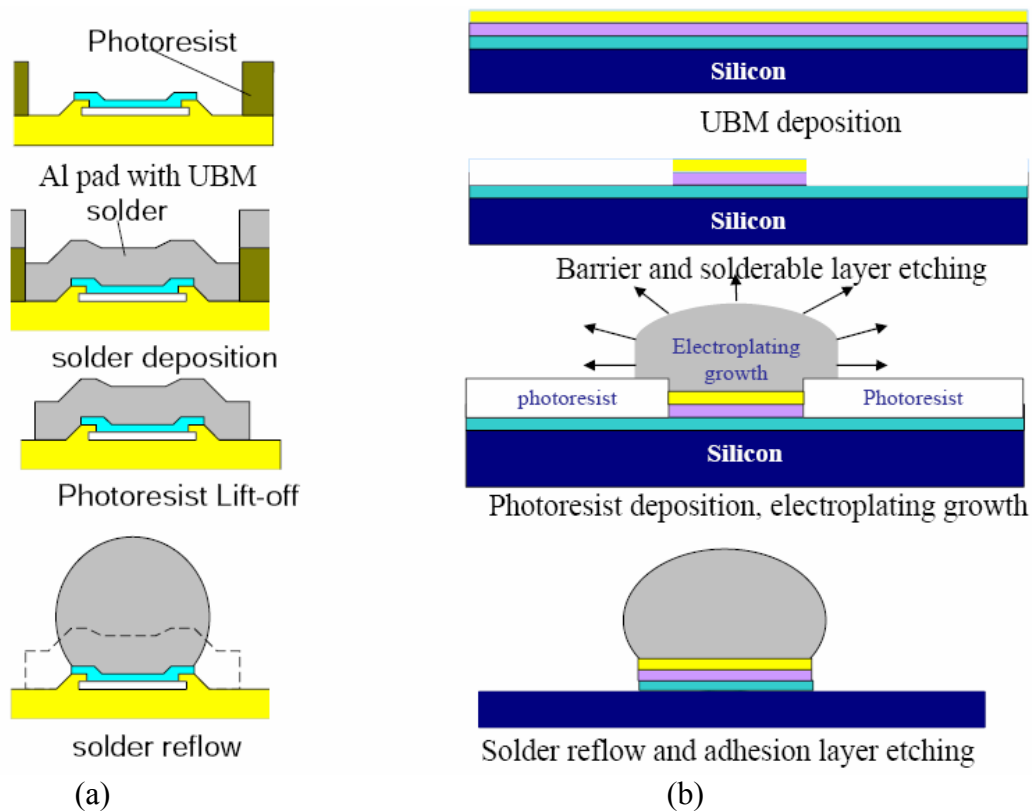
Two typical forming processes of flip chip solder bumps:
